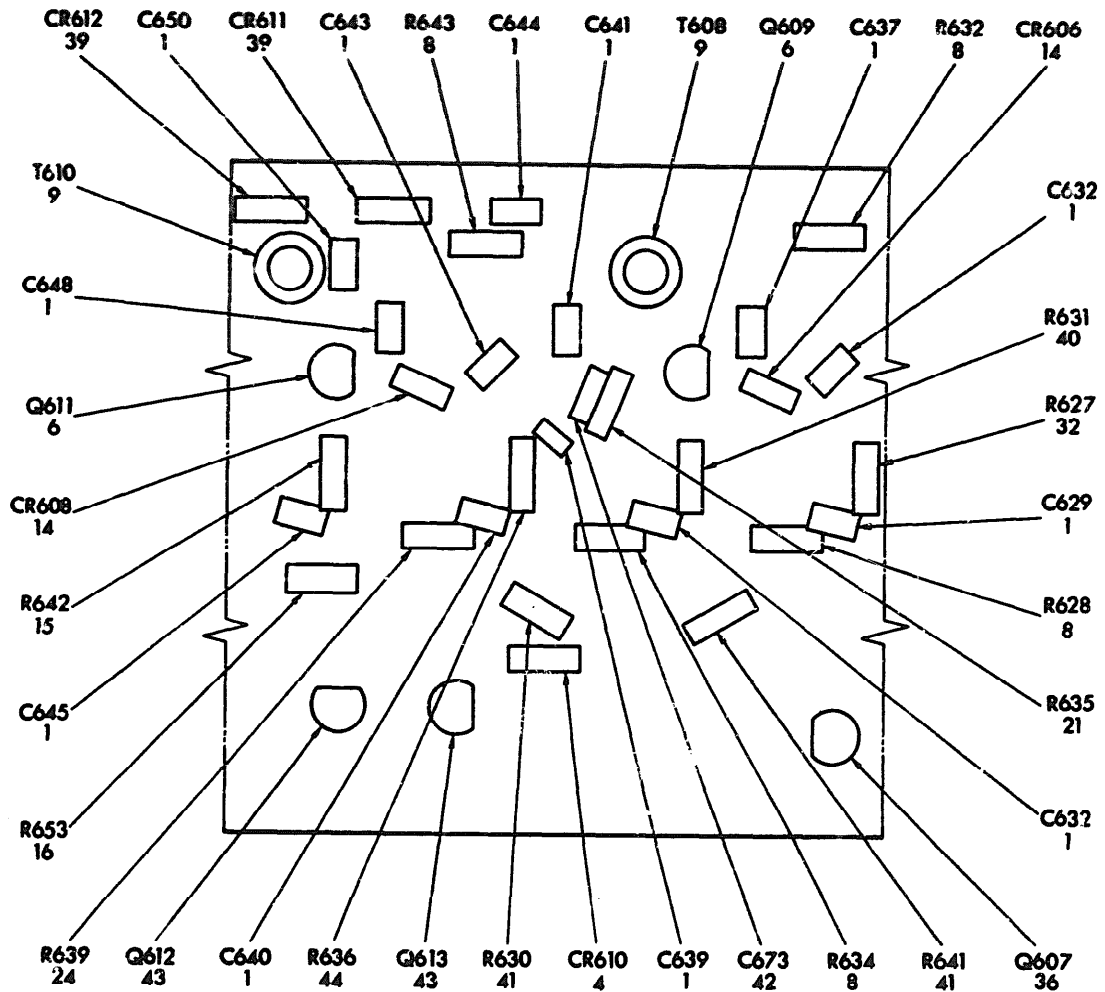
4. ELECTRONIC COMPONENTS ASSEMBLY /SHEET 3 OF 5/
